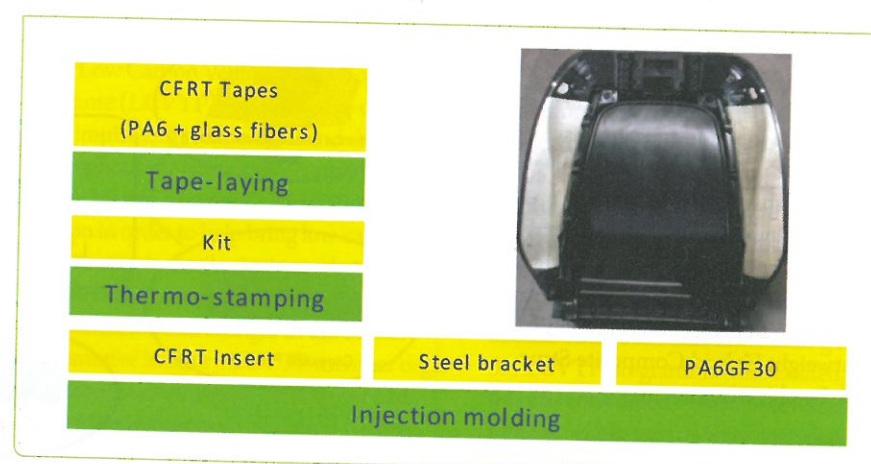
Three processes are used for the manufacture of the composite backrest: 1) standard stamping of steel brackets, 2) thermostamping of CFRT inserts, and 3) over-moulding of inserts (steel and CFRT) with PA6GF35 by injection moulding
